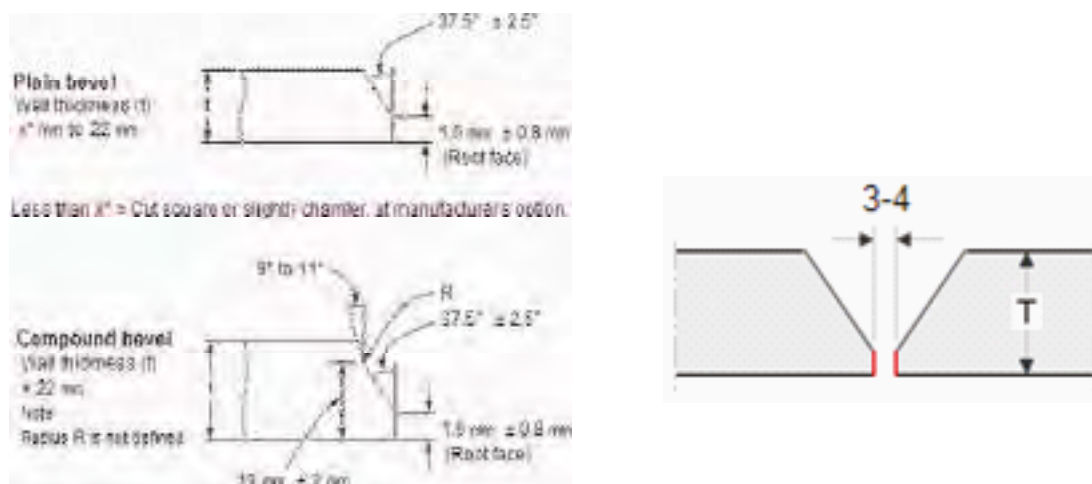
Butt Weld Grooves Preparation
